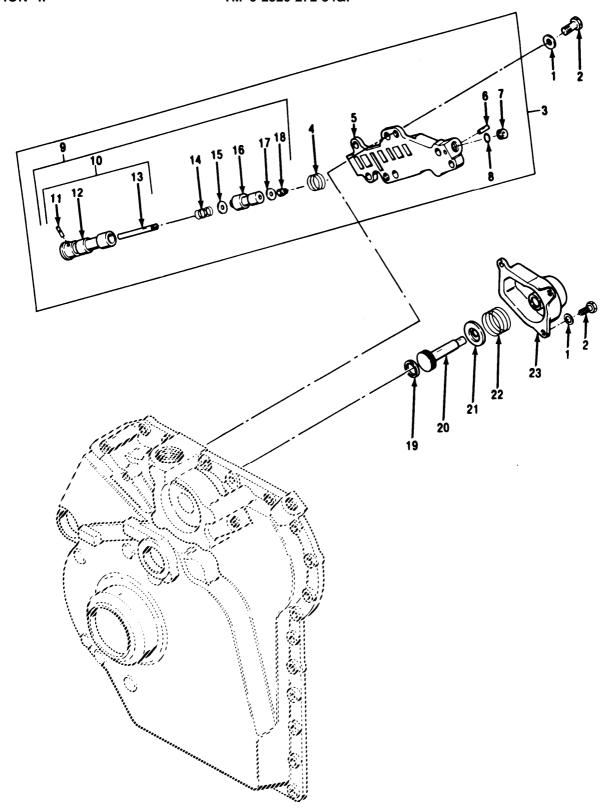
Right Brake Apply and Brake Coolant Valve Body
